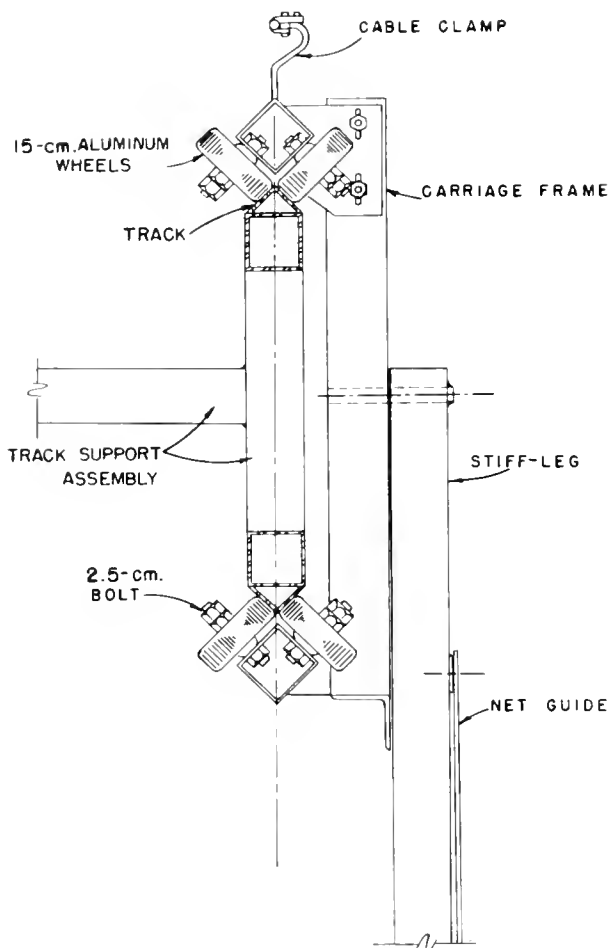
Diagrammatic cross section of track, carriage, and cable clamp.
